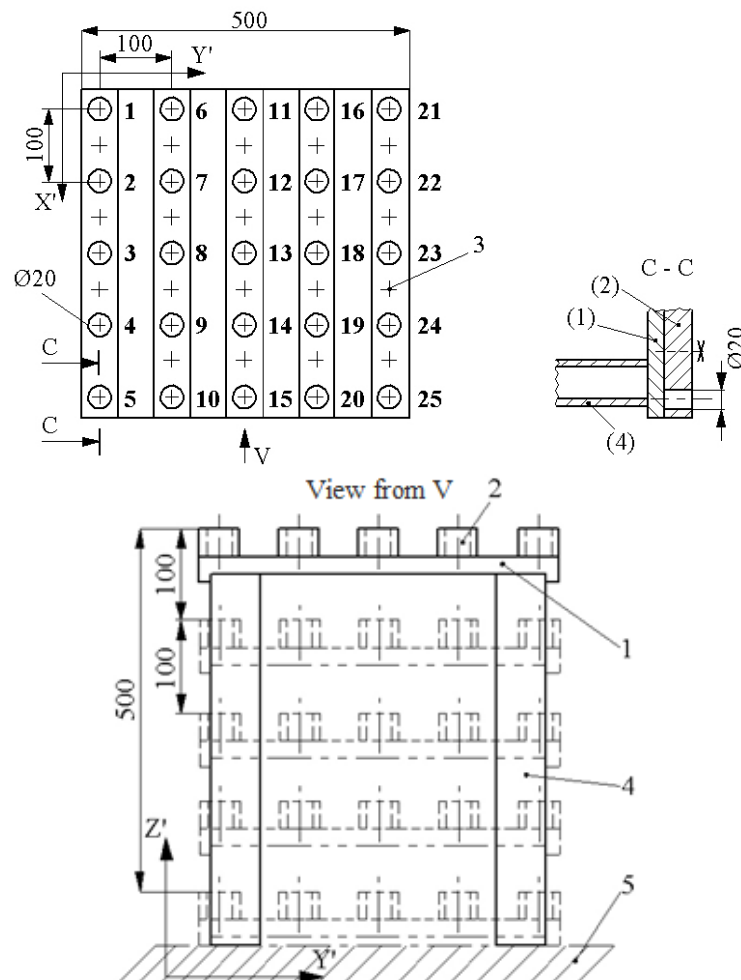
Calibrated device: 1- calibre body; 2- rail; 3- screw; 4- leg; 5- machine table
